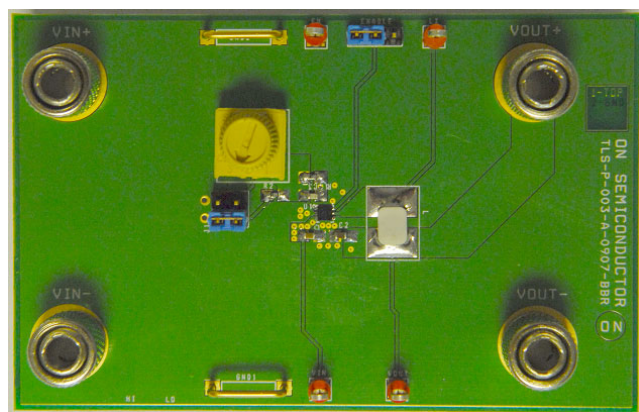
NCP1529MUTBGEVB Board Picture in UDFN-6
